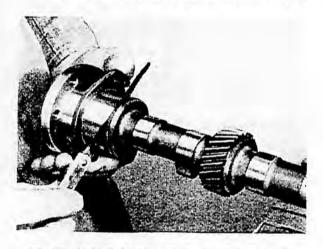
FRONT CAMSHAFT BEARING END-FLOAT
